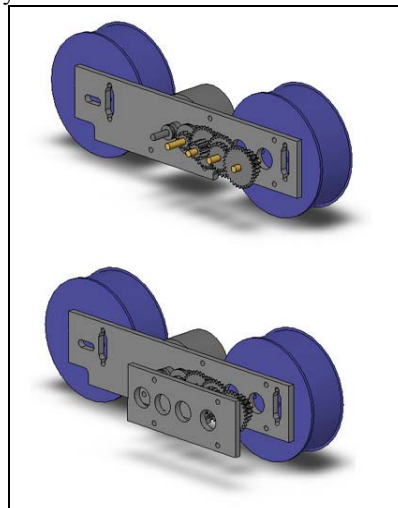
The assembly of gearbox, motor, and the wheels of one side of robot
